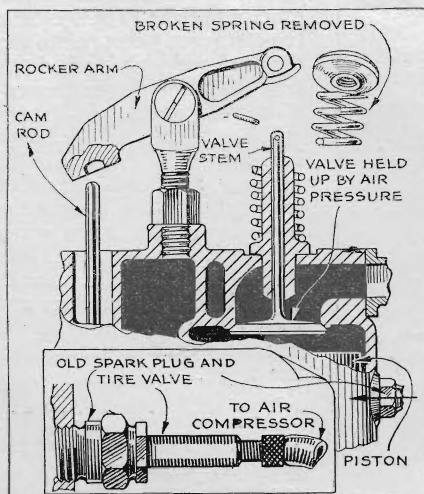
Air pressure used to make a quick change of valve springs on overhead motor.
